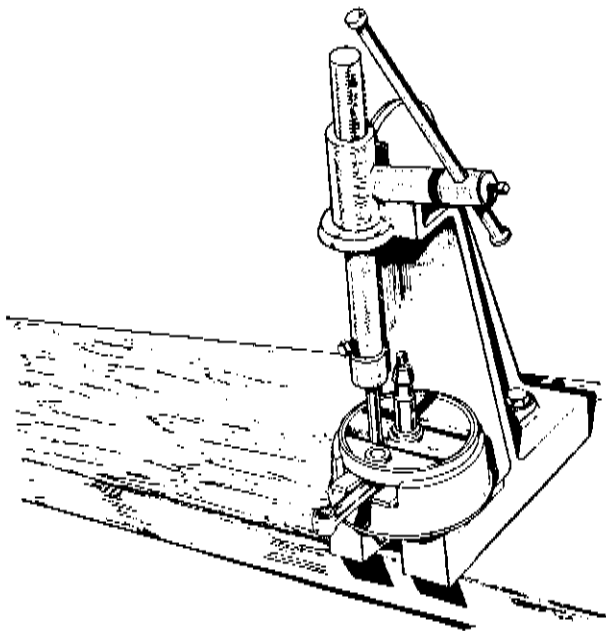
A. Parting the Flywheels with Service Tool 61 3589.
